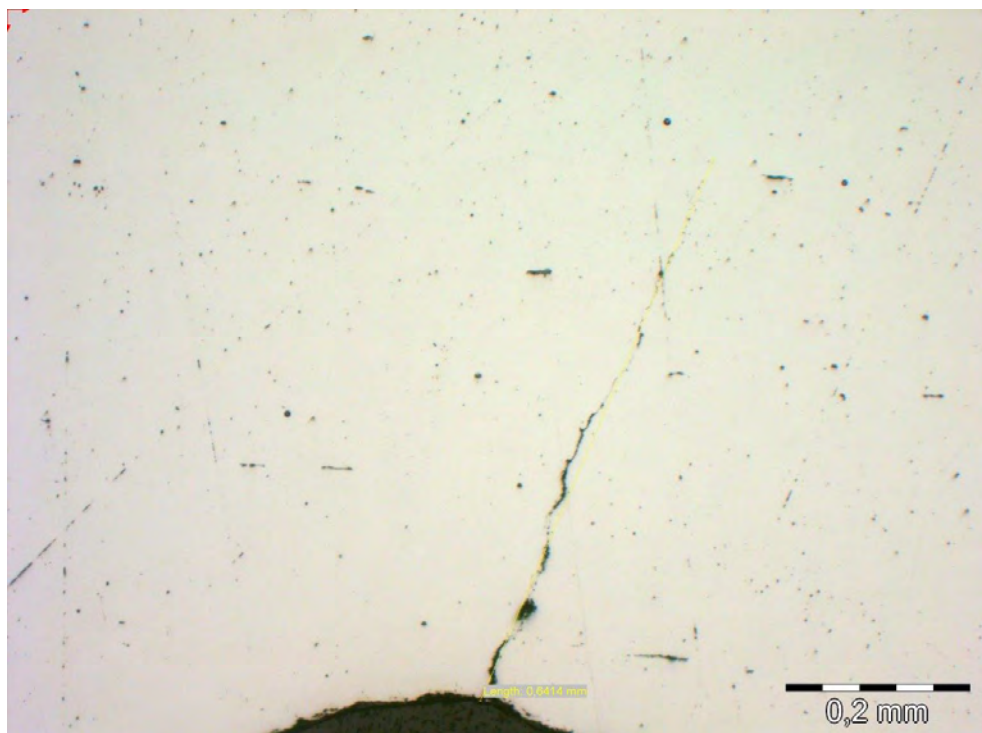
Cut five in crack at segment C, second ridge on barrel no. 14389
